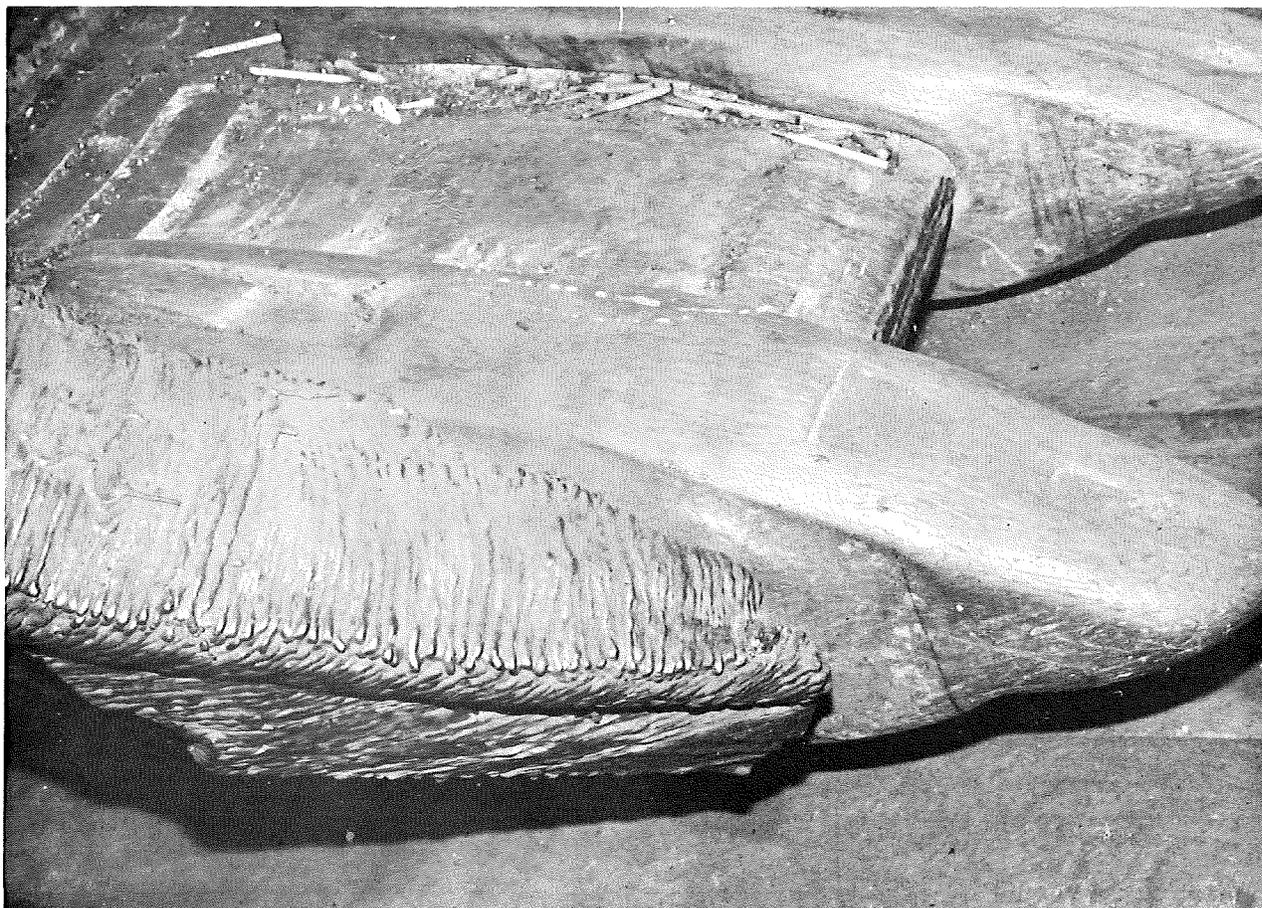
Large weld build up on shovel lip to reinforce lip and provide impact and abrasion resistance.
